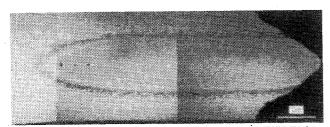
Section through a fatigue failure in a 7075-T6/7075-T6 low-load transfer weldbonded specimen—medium nugget.
